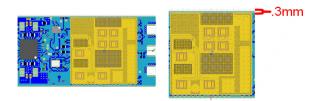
Small form factor board with PCB edge less than 0.3mm
